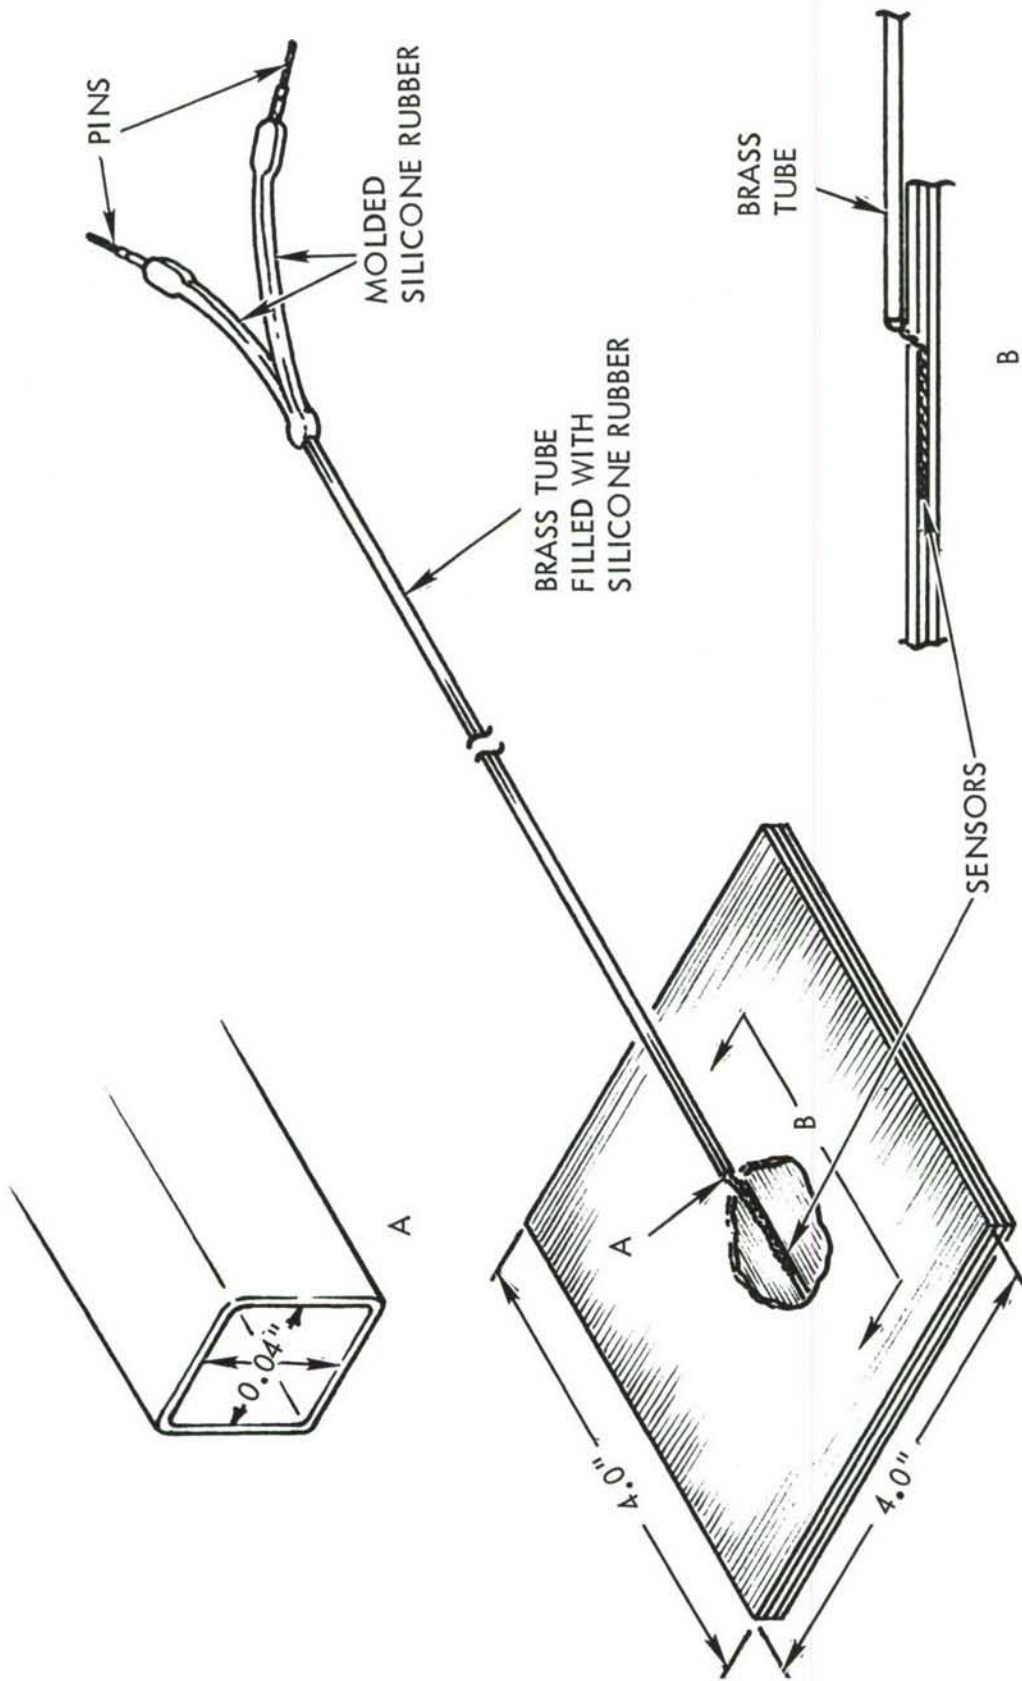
Final Design for Environmental Exposure Specimen and Sensor
